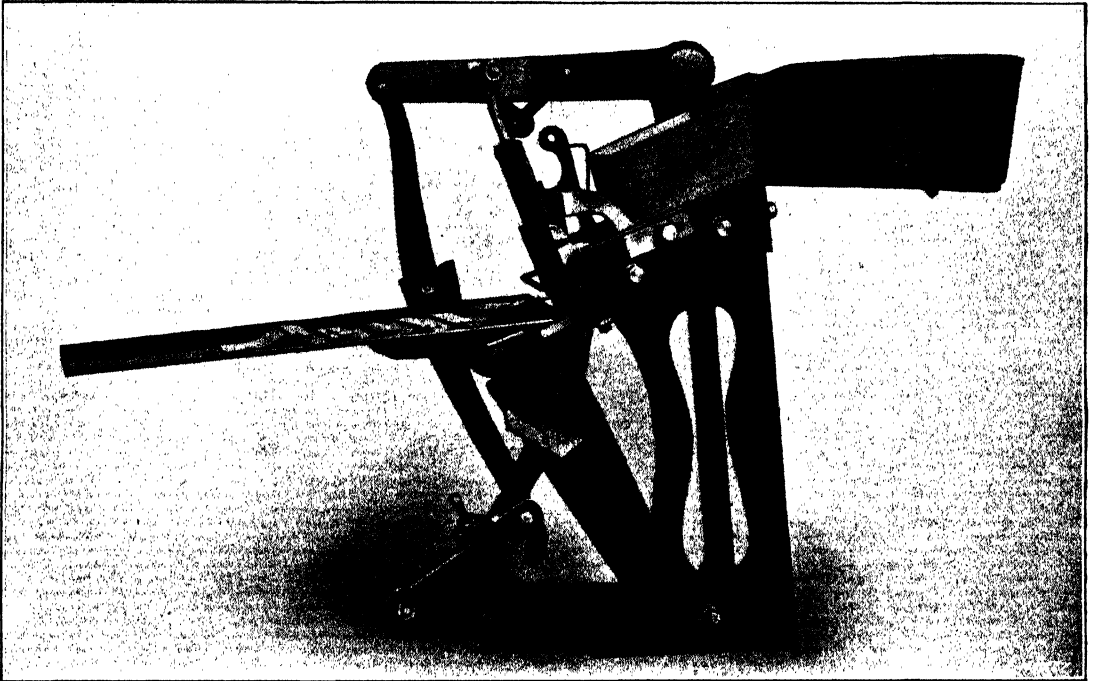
PIN-STICKING MACHINE—E. WHITE.
